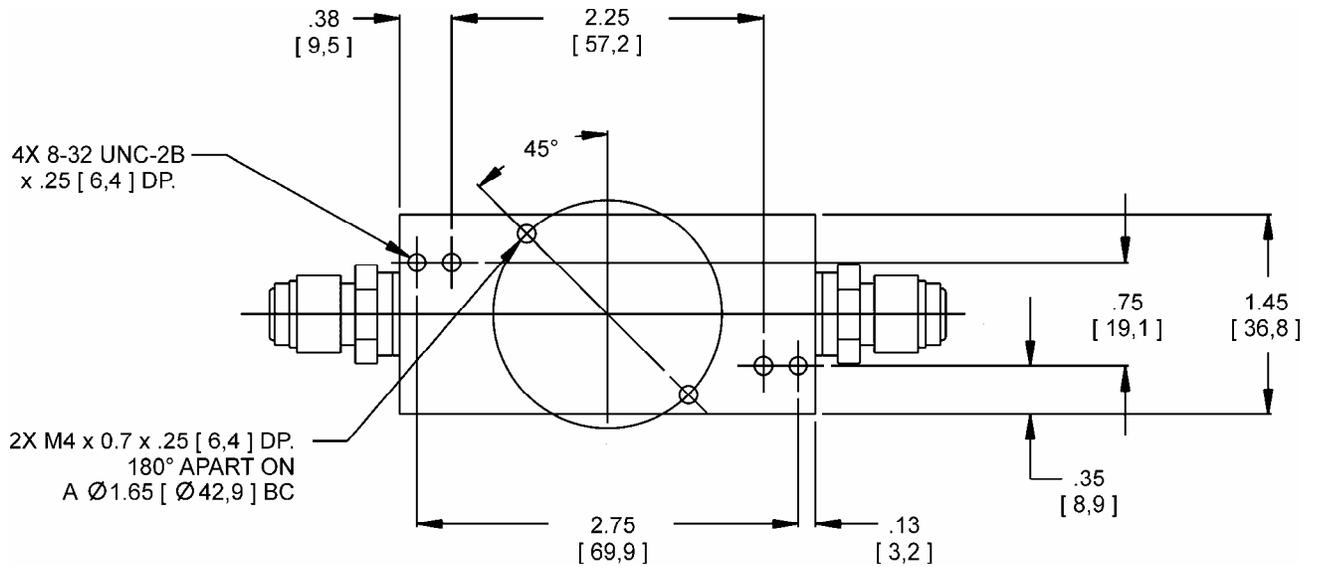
Bottom View of the MKS ALTA Mass Flow Devices (Welded Fittings)
